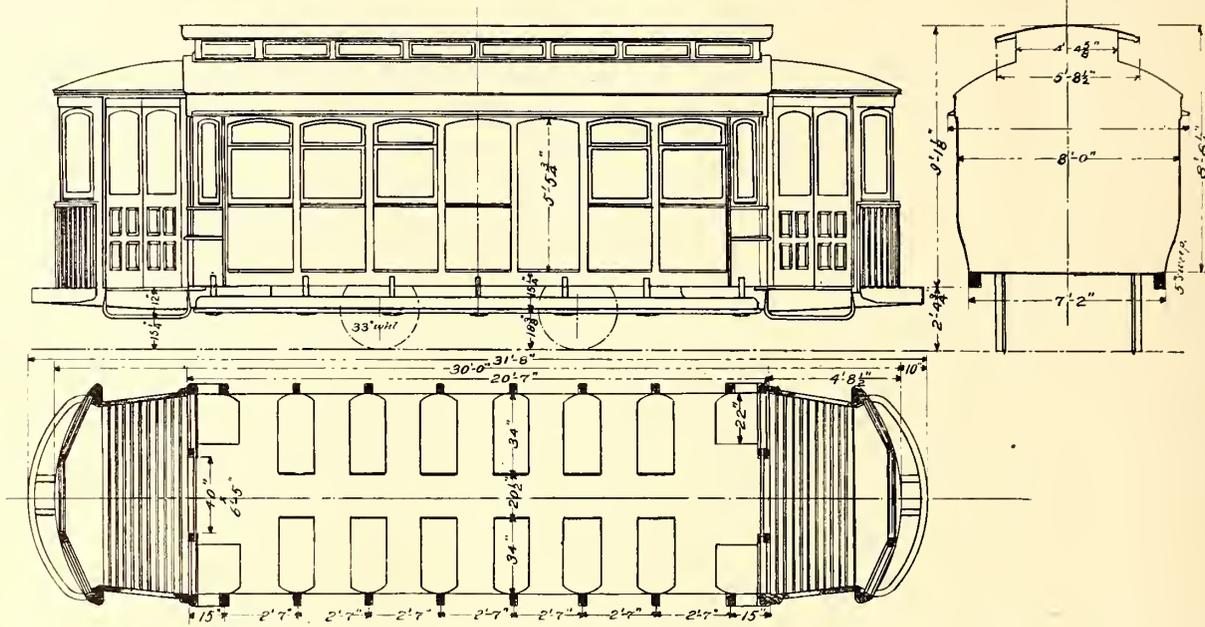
PLAN, SIDE ELEVATION AND END ELEVATION OF STANDARD SINGLE-TRUCK CONVERTIBLE CAR
